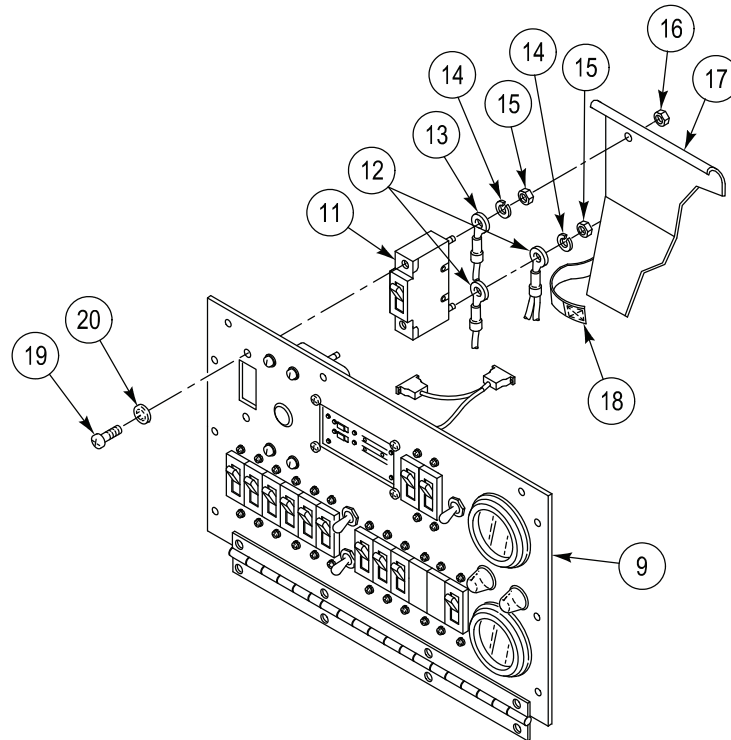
Faceplate Circuit Breaker CB1 Assembly
